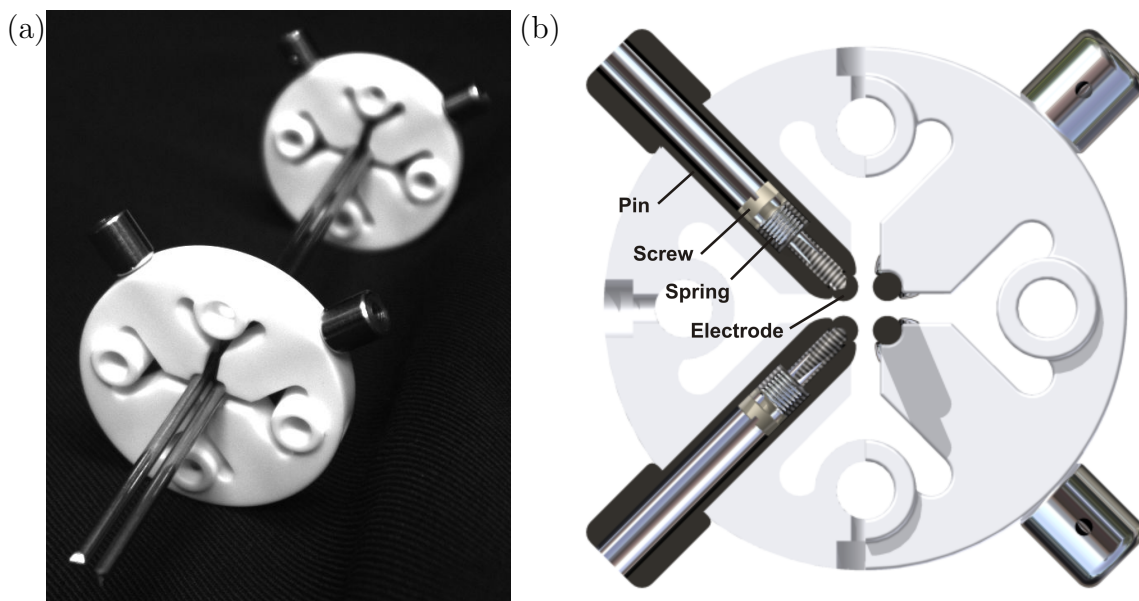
(a) Assembly of a straight section of the electrostatic quadrupole guide. The Macor insulators, electrodes, and pins are visible. (b) Partial cross section of the insulator pin assembly. A M1.6 screw and small compression spring are inserted into the hollow pin. The entire pin assembly is then inserted into the MACOR insulator, and the screw tightened into a tapped hole in the electrode. This pulls the electrode tight against the insulator and locks it into the correct position.
